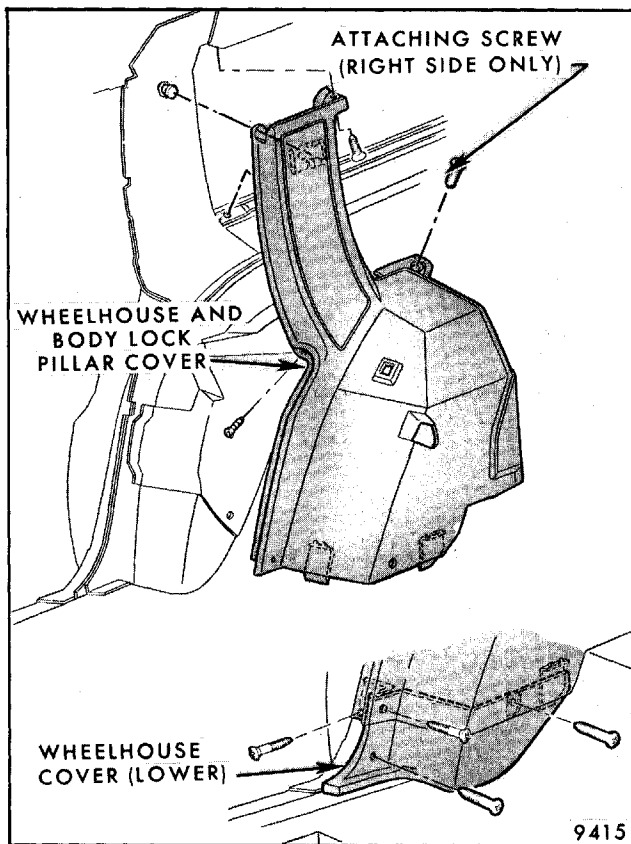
Rear Quarter Wheelhouse and Body Lock Pillar Covers (Upper and Lower) - "B-35" Styles
